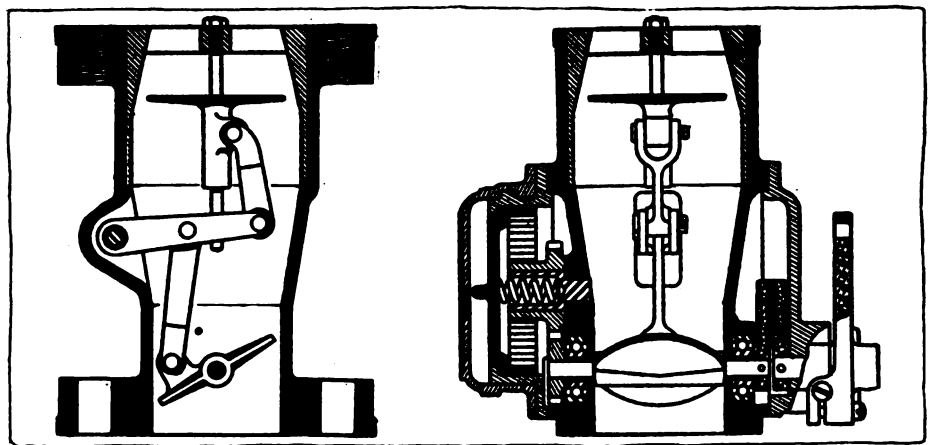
Sections through Kramer engine governor showing operating disk which is raised or lowered according to the speed of the incoming gases, thus opening or closing the butterfly valve below
